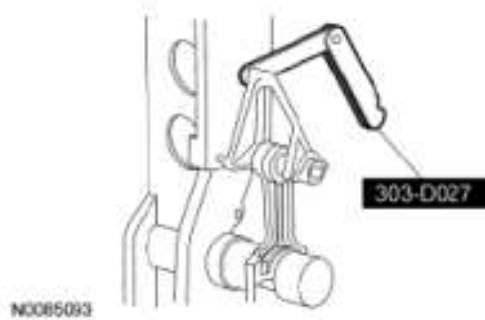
Measuring Connecting Rod Bend On Suitable Alignment Fixture
